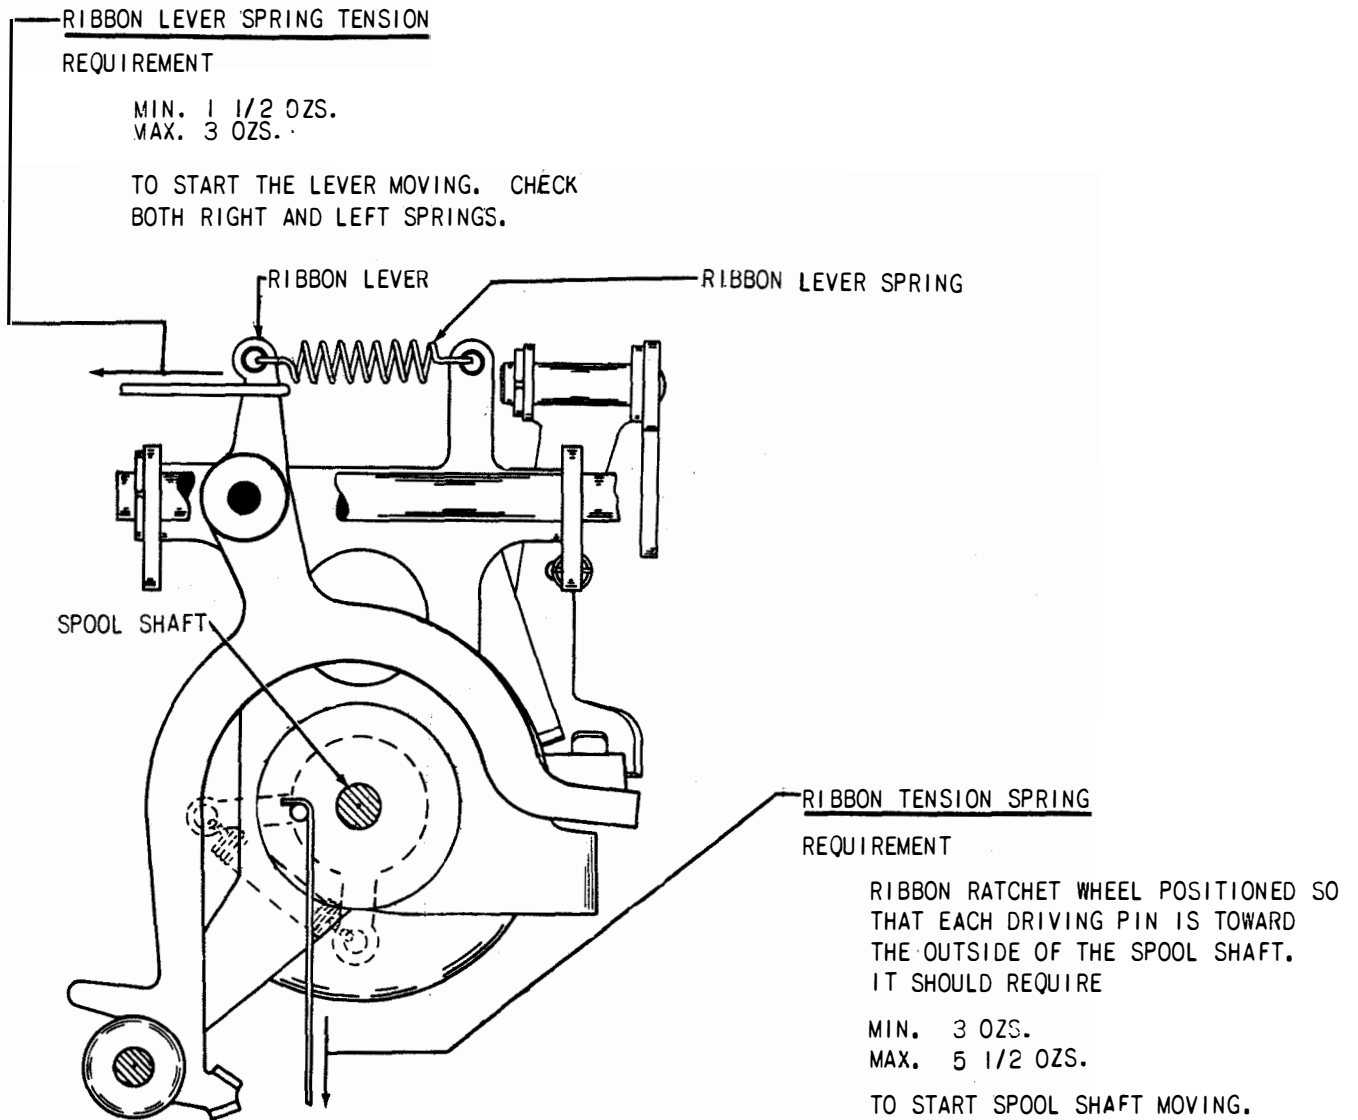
Automatic Typewriter, Ribbon Reverse Mechanism, Top View
